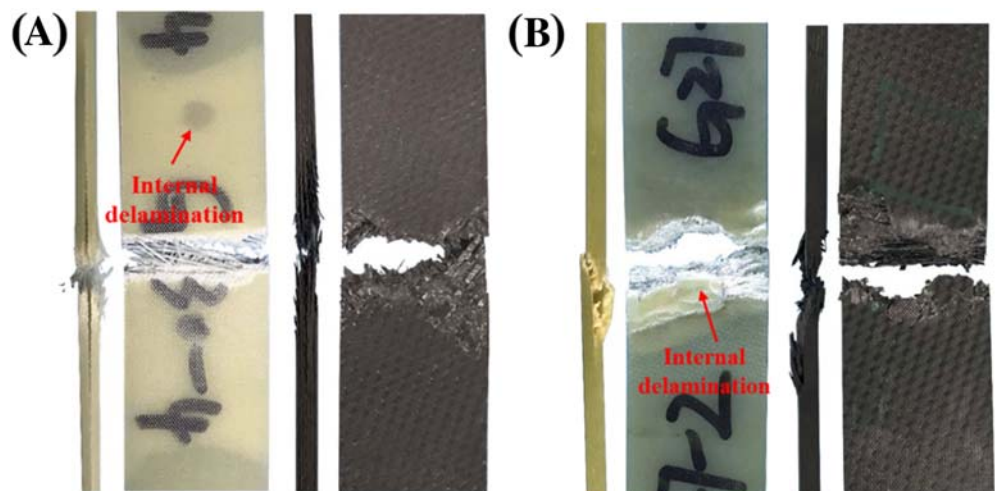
Failed specimens: (A) under tensile fatigue loading, (B) under compressive fatigue loading [Colour figure can be viewed at wileyonlinelibrary.com]
